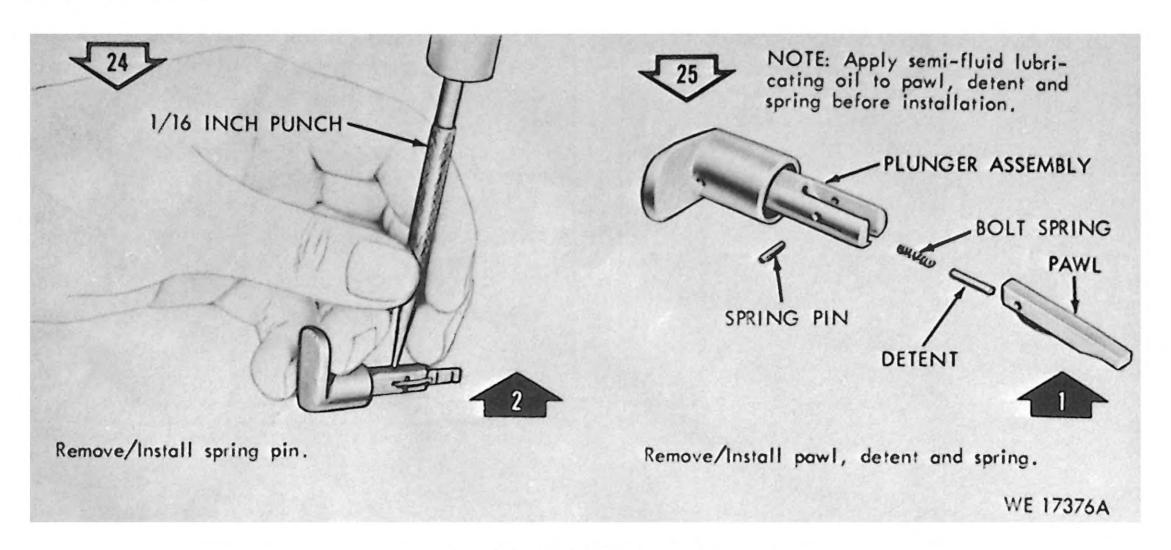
Disassembly/assembly of upper receiver group. (6 of 6)
